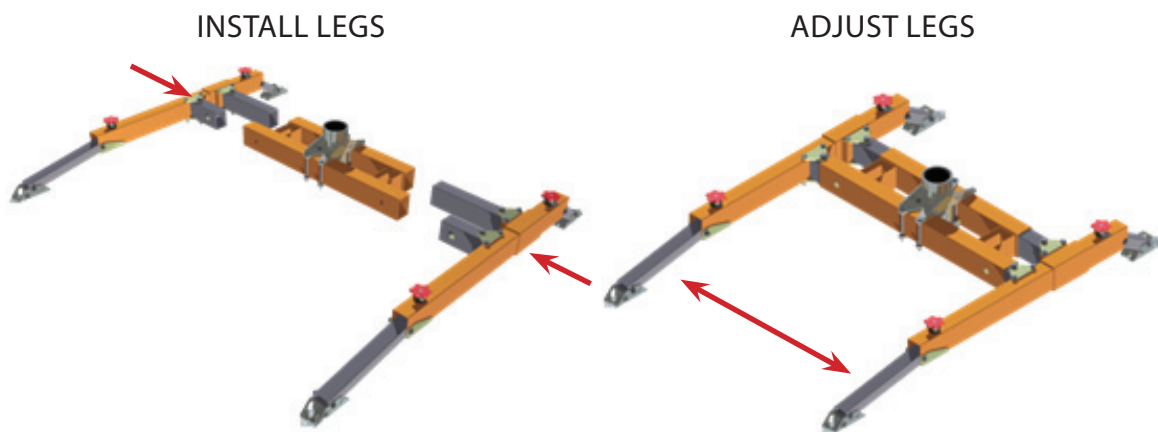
, Assembling & Adjusting PRO-3 Portable Base (Typical)
